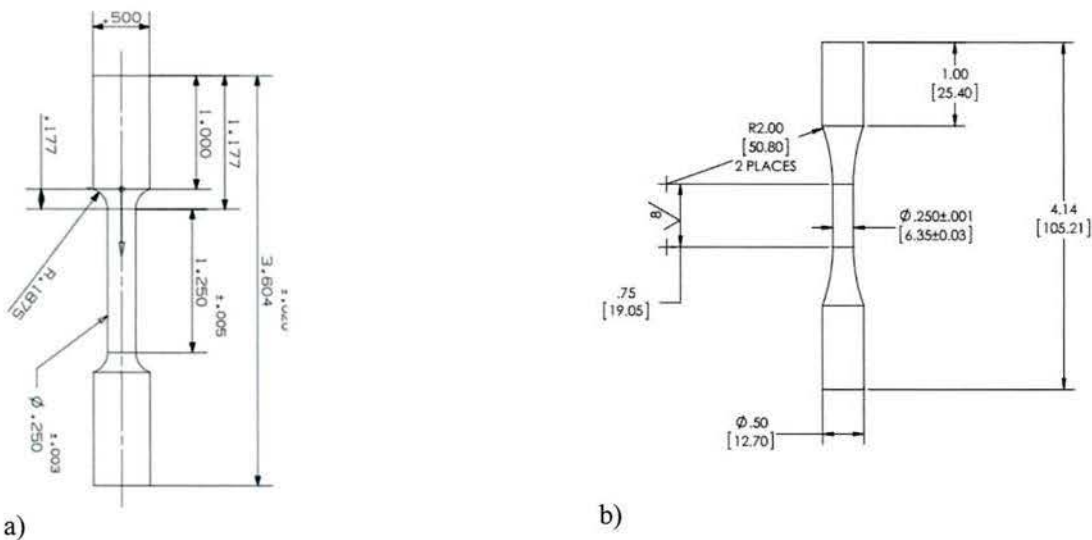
a) Ultimate Tensile Specimen b) Fatigue Specimen
